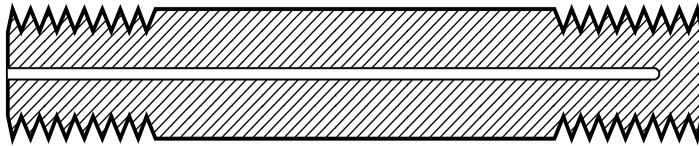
Hole Drilled to Measure Elongation When One End of Stud or Bolt Is Not Accessible
